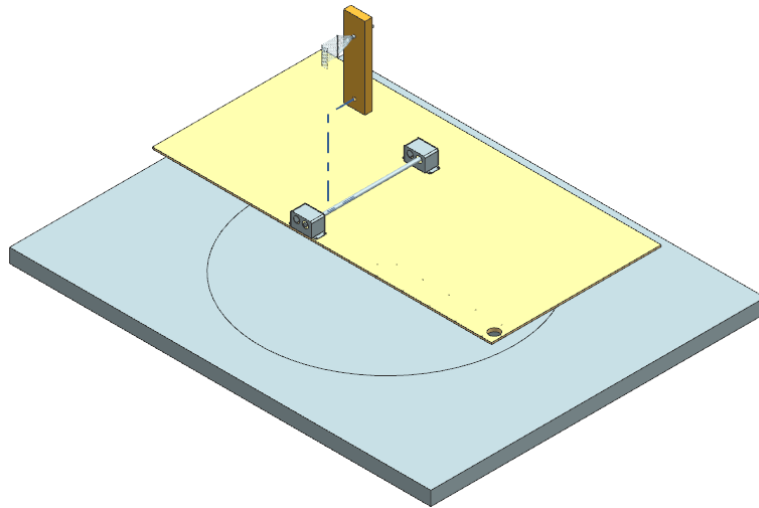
CAD - Wake Rake Attachment to the Slider
